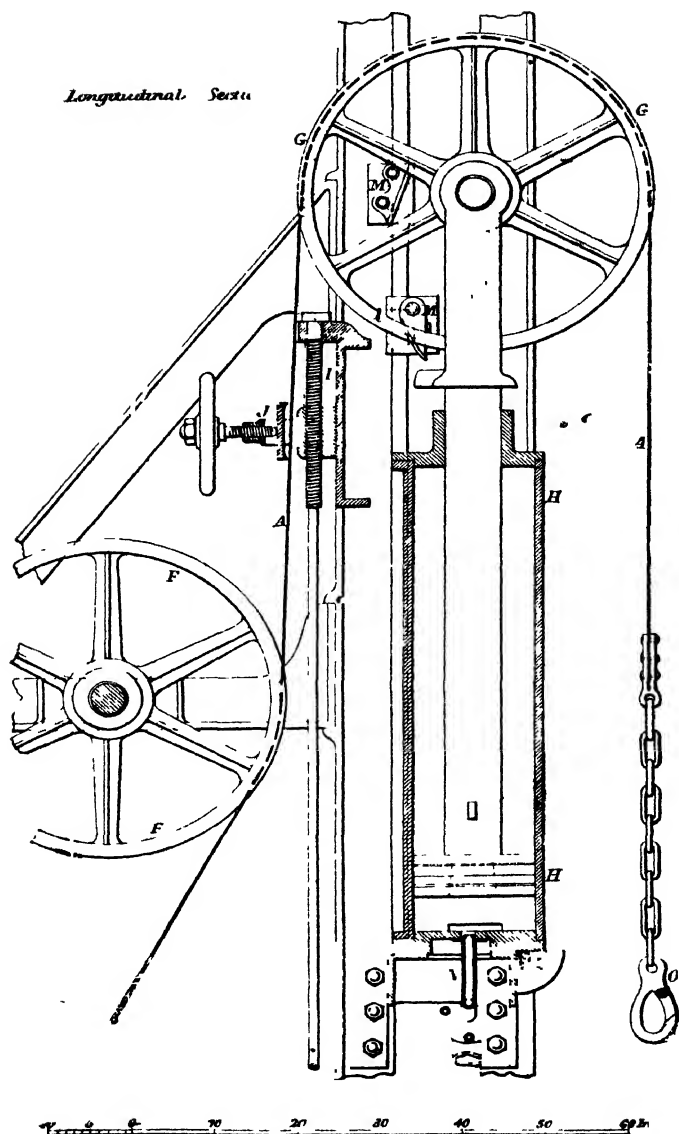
MATHER & PLATT LARGE BORING MACHINE.
